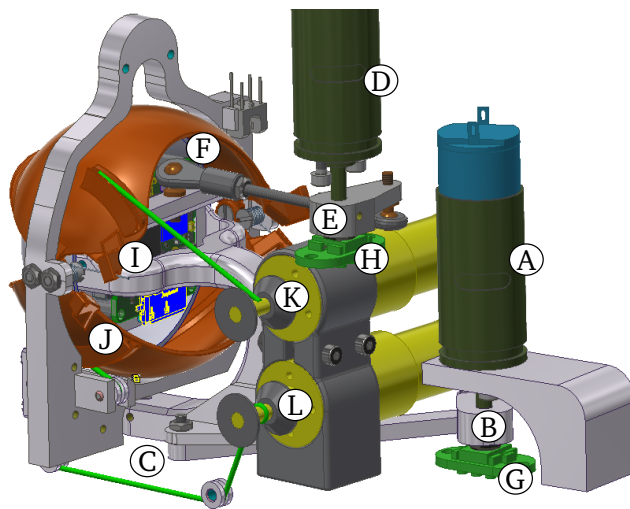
A CAD rendering of the actuation principle of the prototype.
